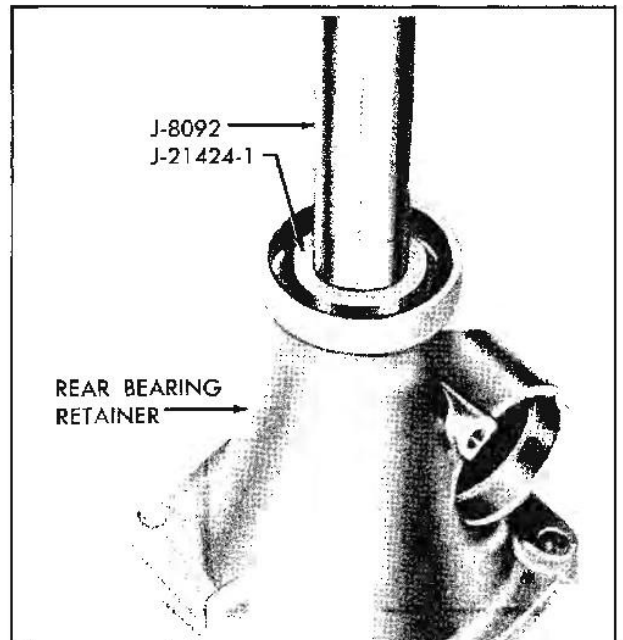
B-33 Installing Rear Bearing Retainer Bushing
